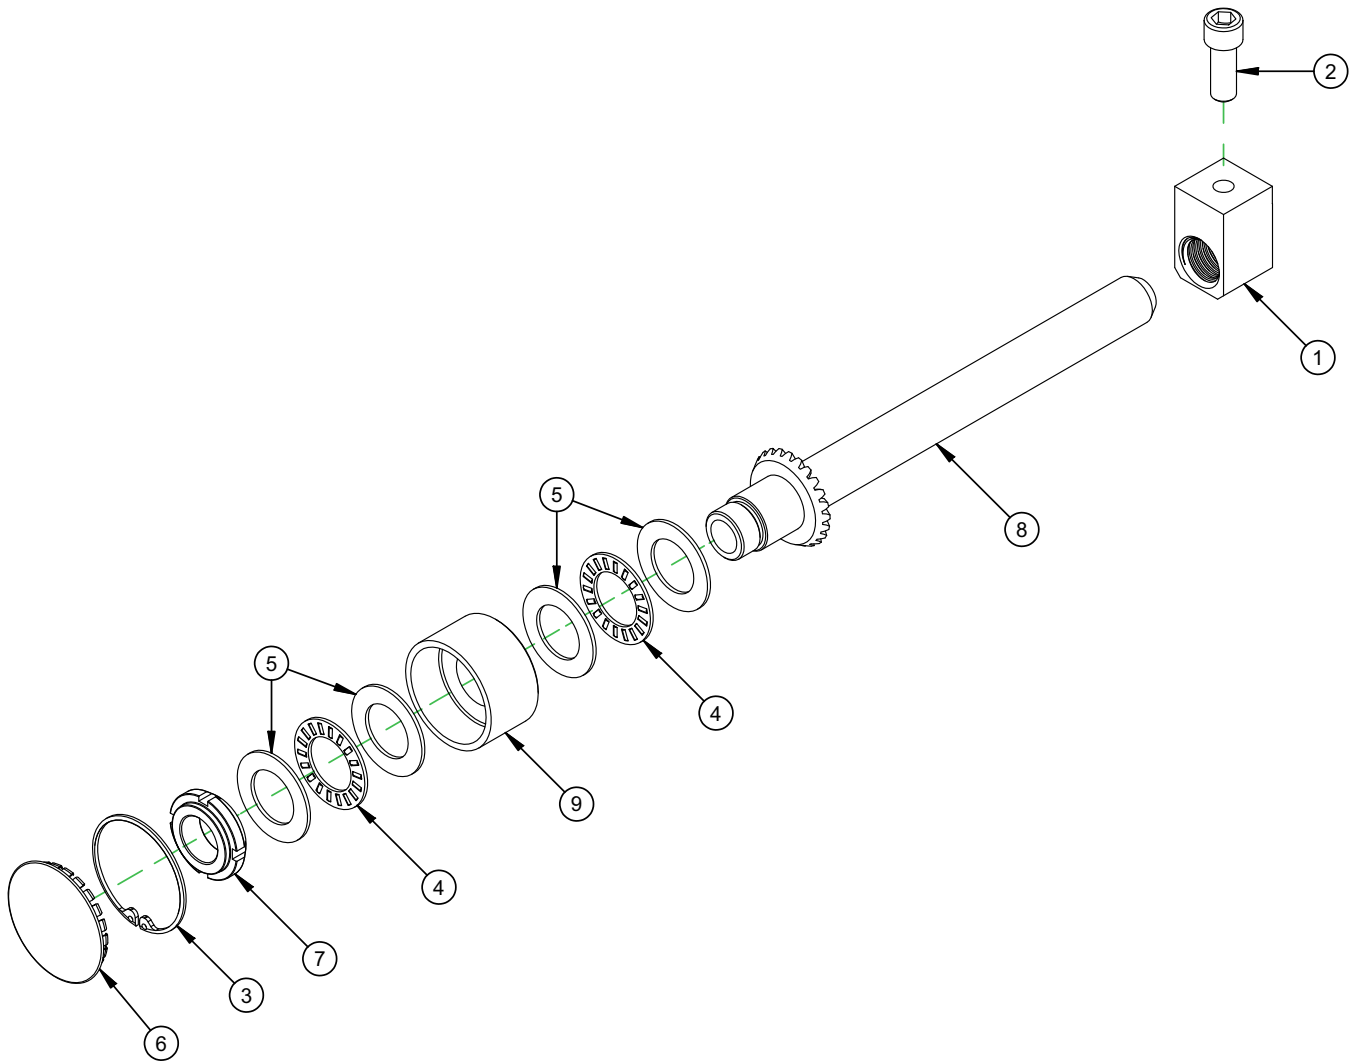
CLAMP ASSEMBLY (P/N 15647)
